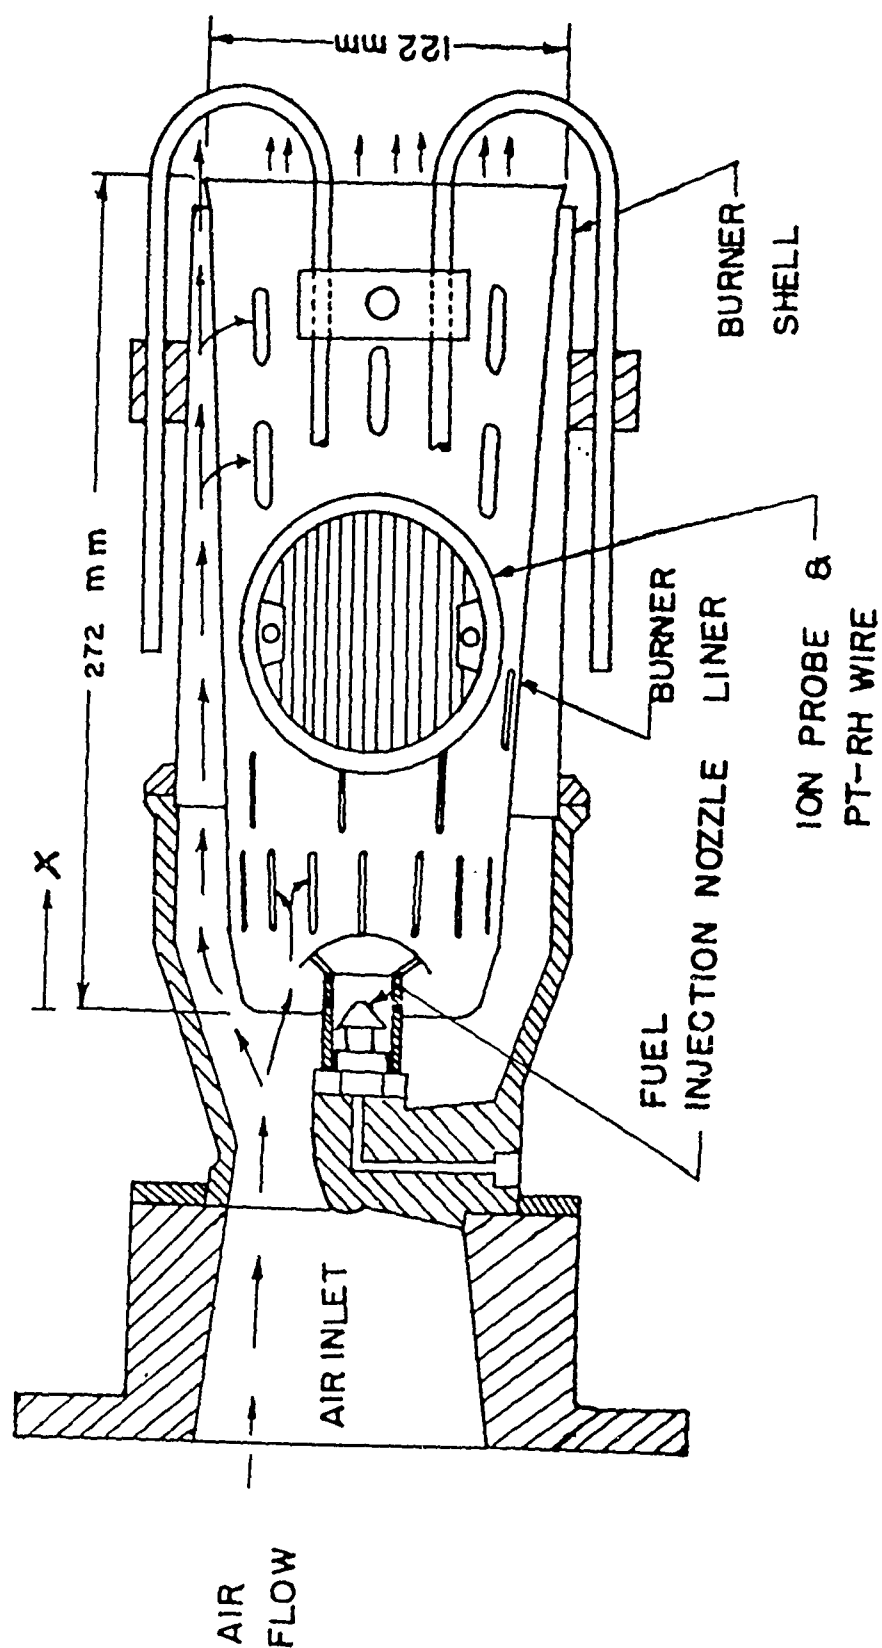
Cutaway view of combustor and schematic of ionization probe.
